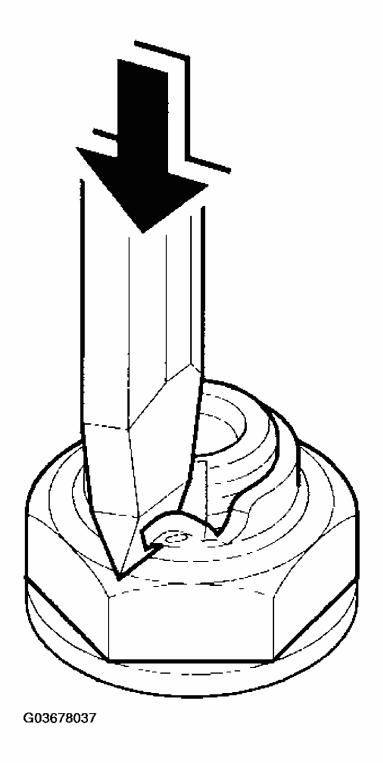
Cutting Lock Tabs Of Locknut Courtesy of AMERICAN HONDA MOTOR CO., INC.
